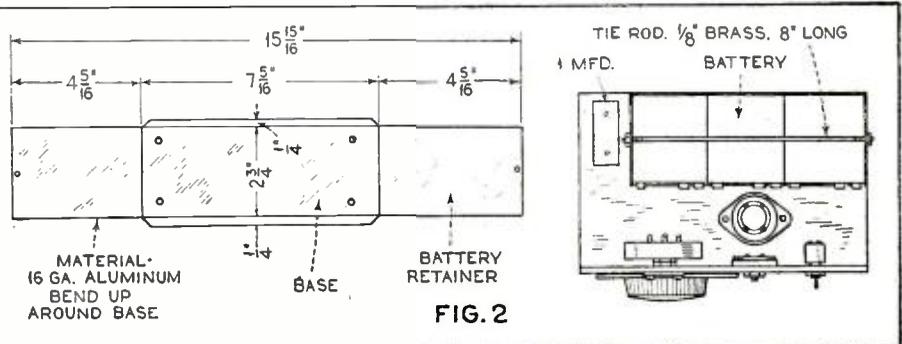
Layout and constructional details of the portable vacuum tube voltmeter
